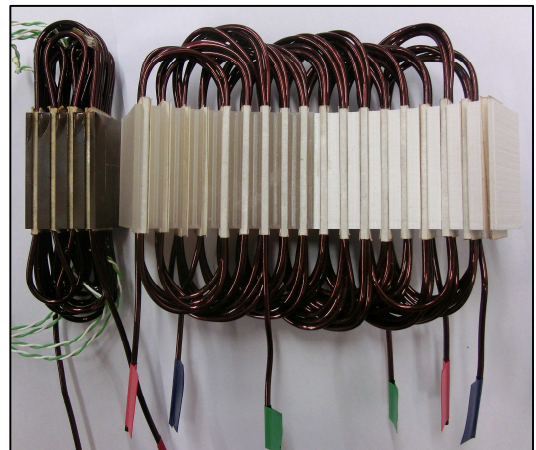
Motorette (left) with rapid-prototyped stator section model (right)
